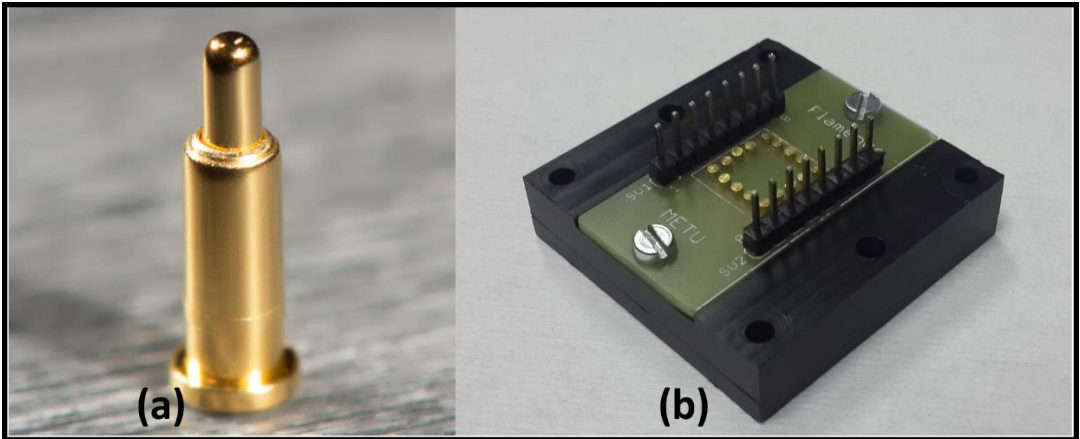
Close-up views of a pogo pin (a) and the assembled 8-channel holder (b).
